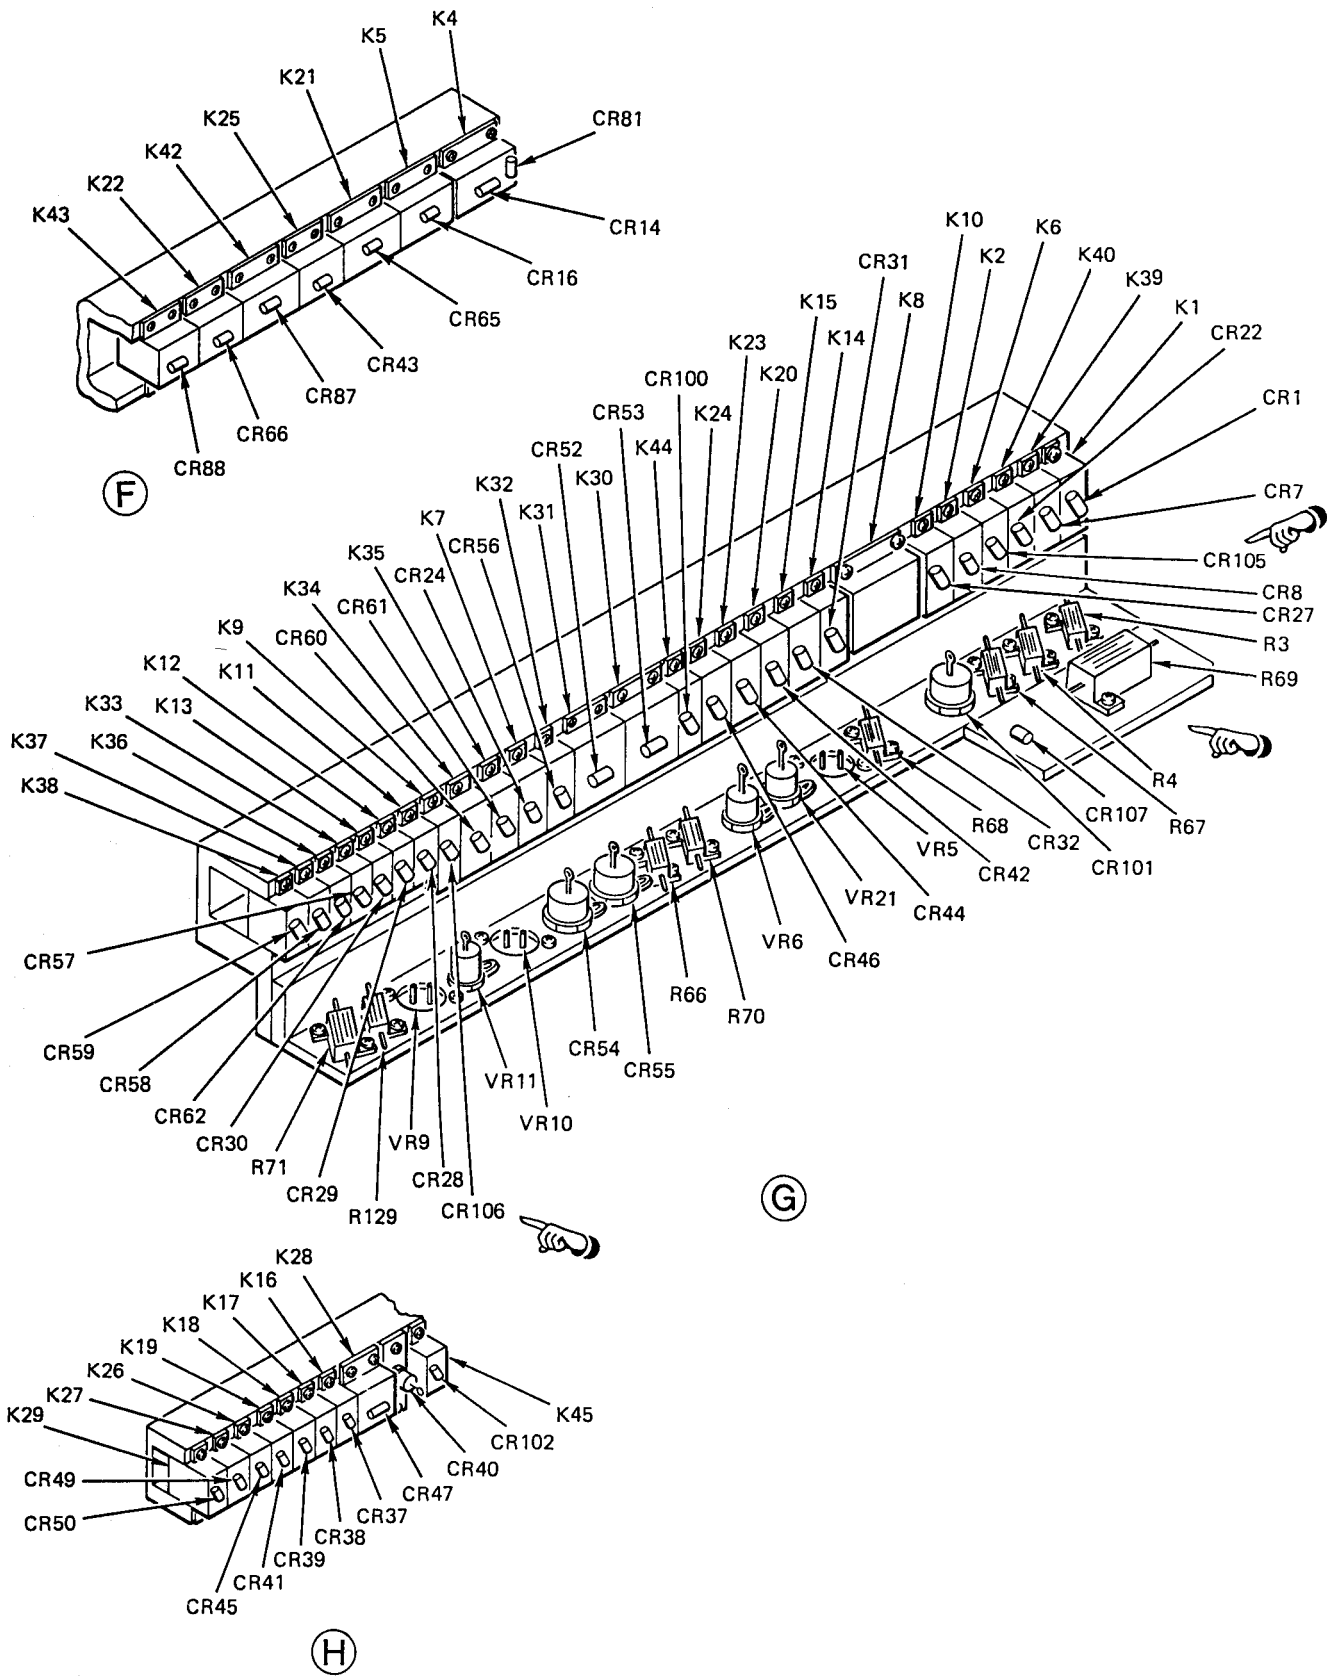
Power Supply Test Set Parts Location Diagram (Sheet 5 of 6)
